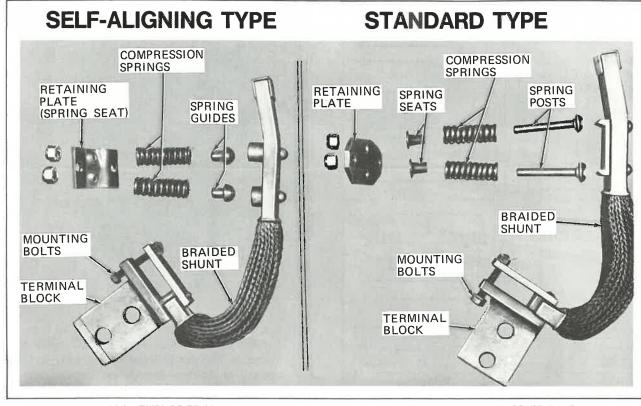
EXPLODED VIEW OF SELF-ALIGNING AND STANDARD FINGER ASSEMBLIES.
